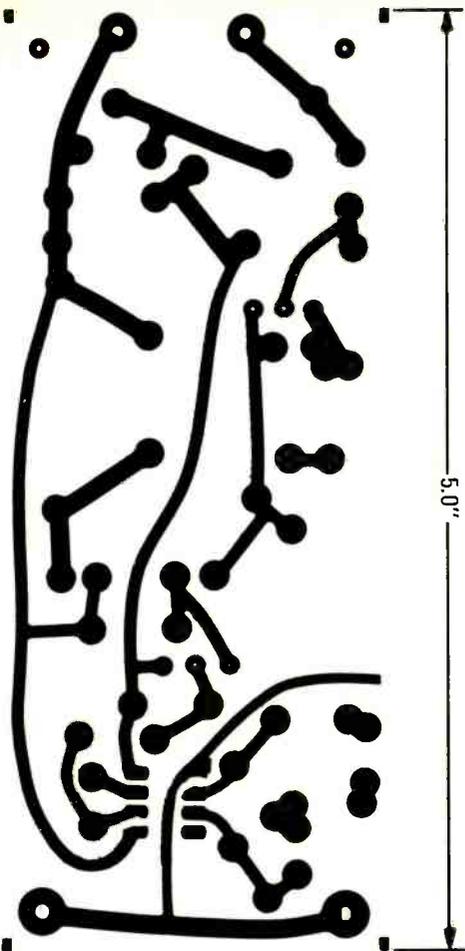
FOIL PATTERN of the ring detector PC board shown full size.
